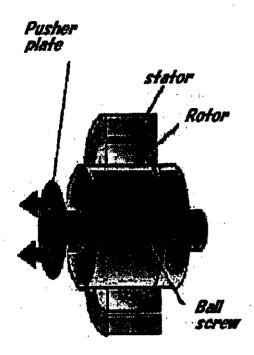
Schematic drawing of the ball screw magnetic motor for implantable artificial myocardium.
